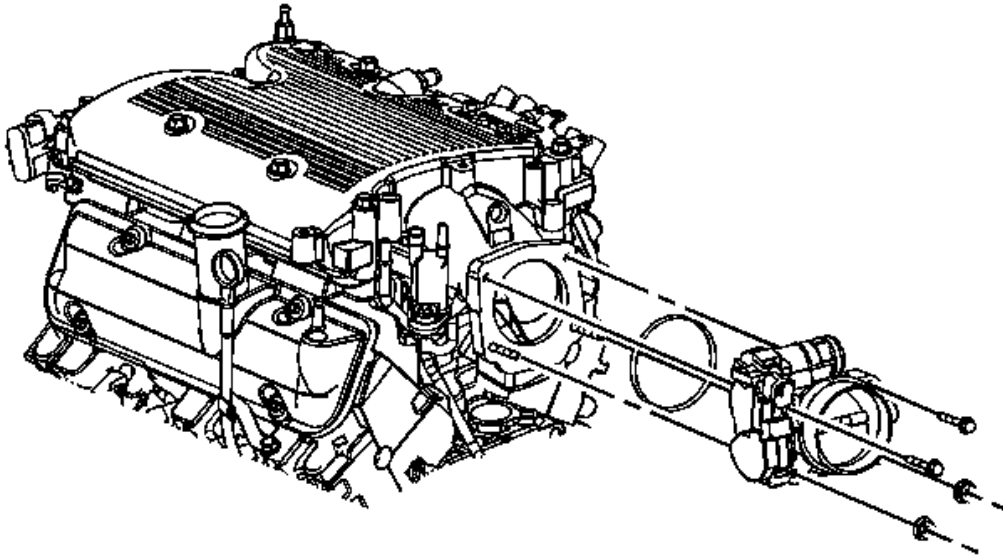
Identifying Throttle Body, Throttle Body Seal & Intake Manifold
